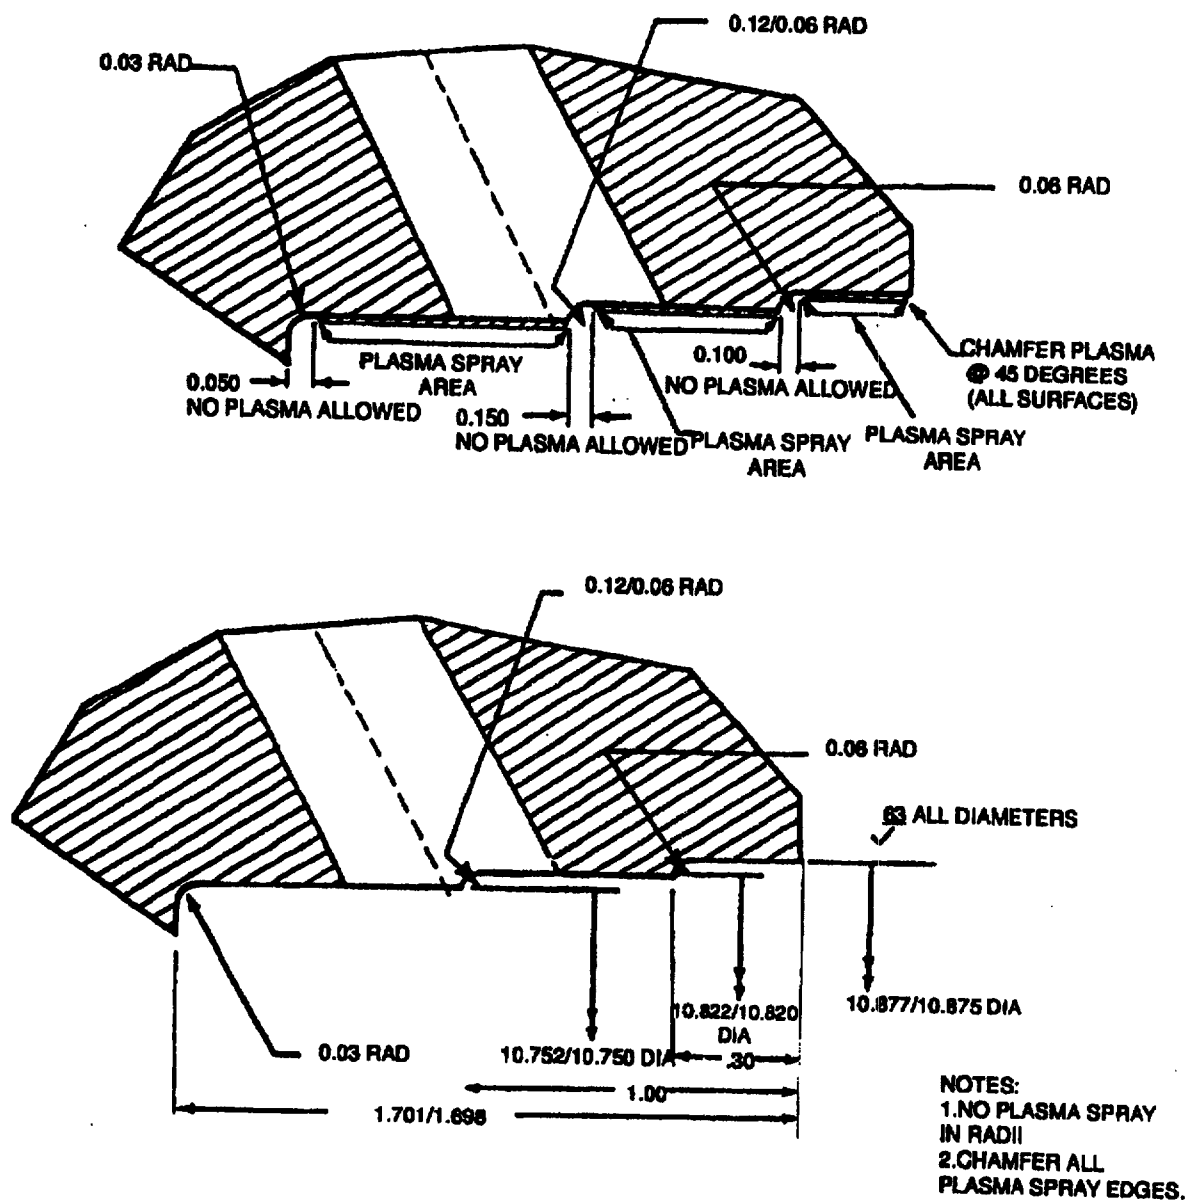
Inlet Housing VIGV Area Plasma Spray and Machining Dimensions.
